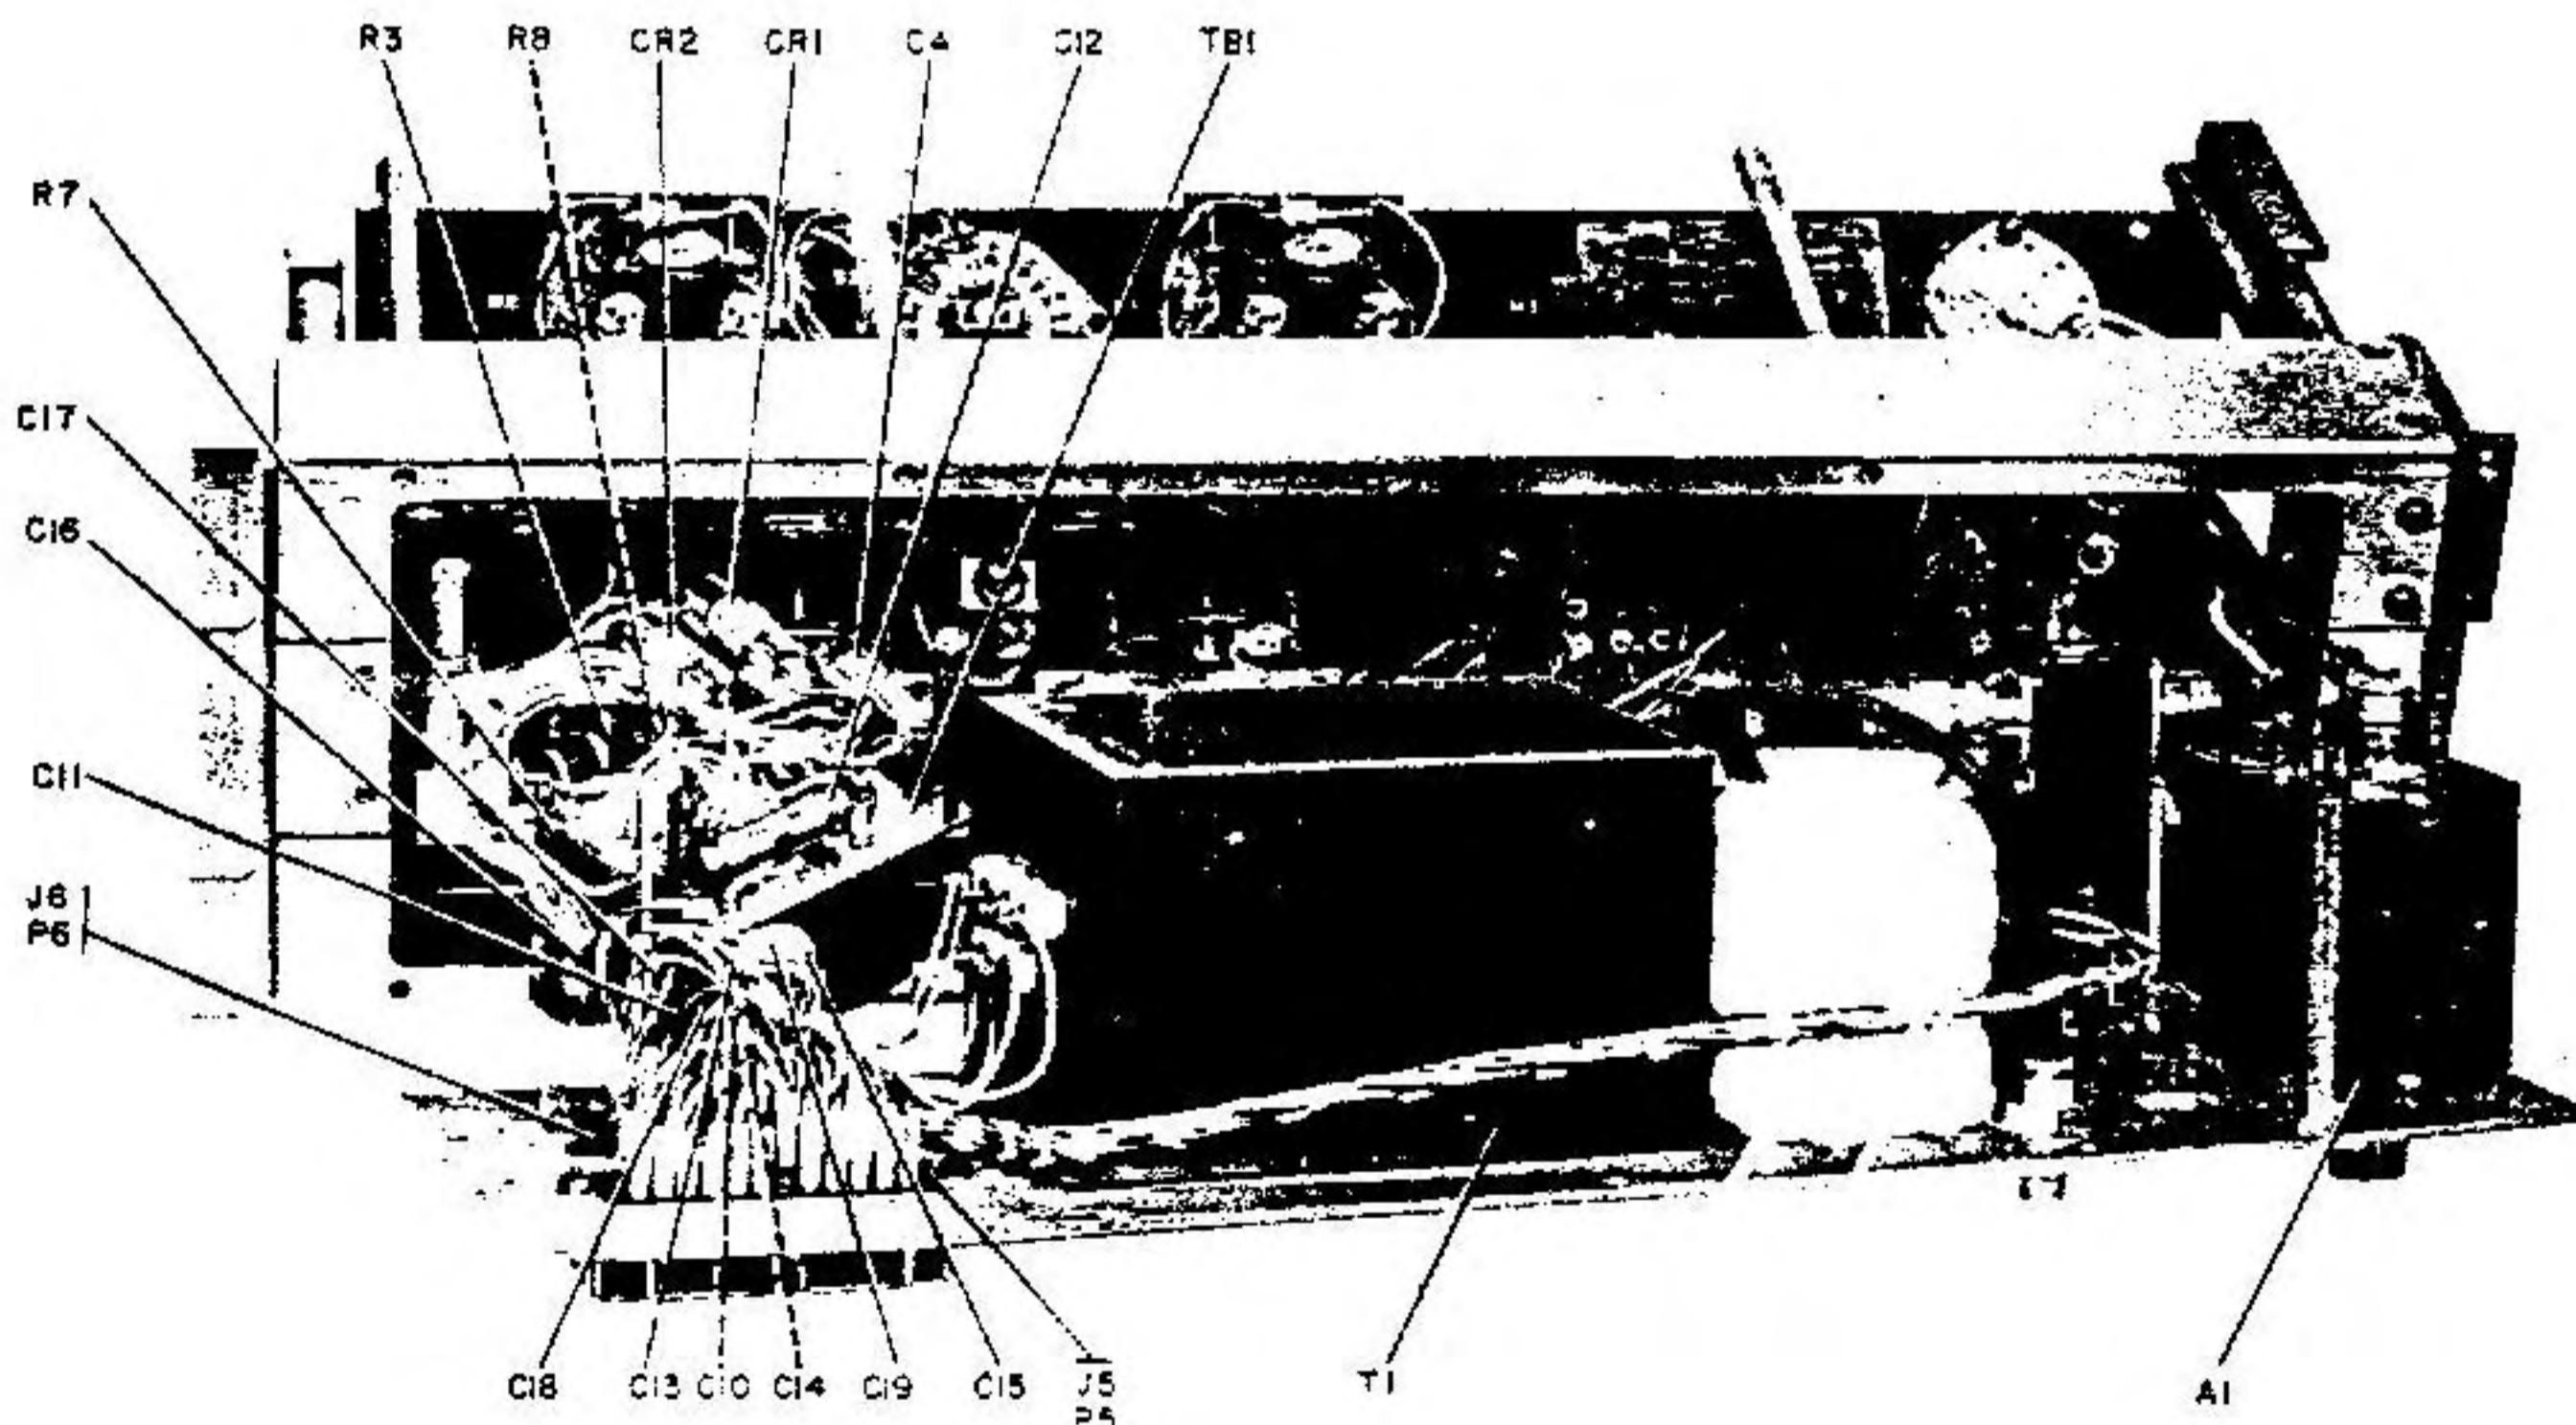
Coupler Control C-2698/SRA-22, Rear Panel Removed
